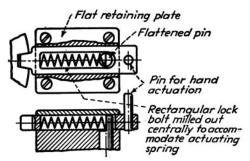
In this design the rectangular lock bolt is milled out centrally to accommodate actuating spring. A pin is provided for hand actuation when desired.
